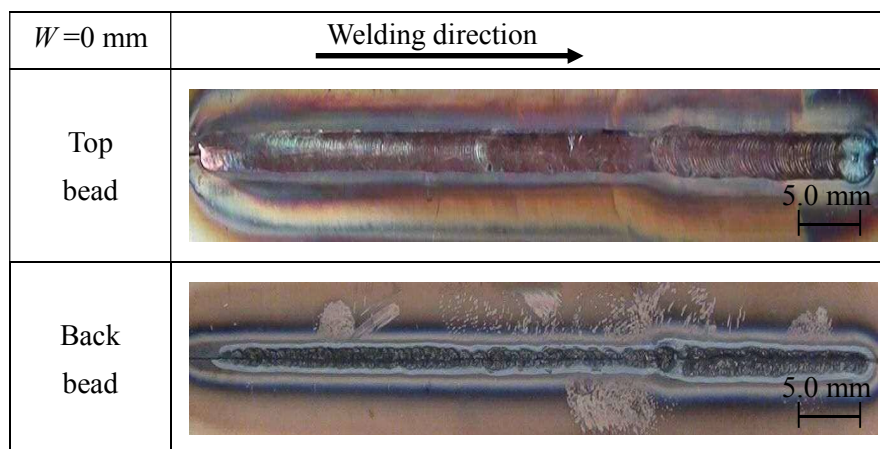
Appearance of hybrid welding beads without laser weaving ($W=0$ mm)
